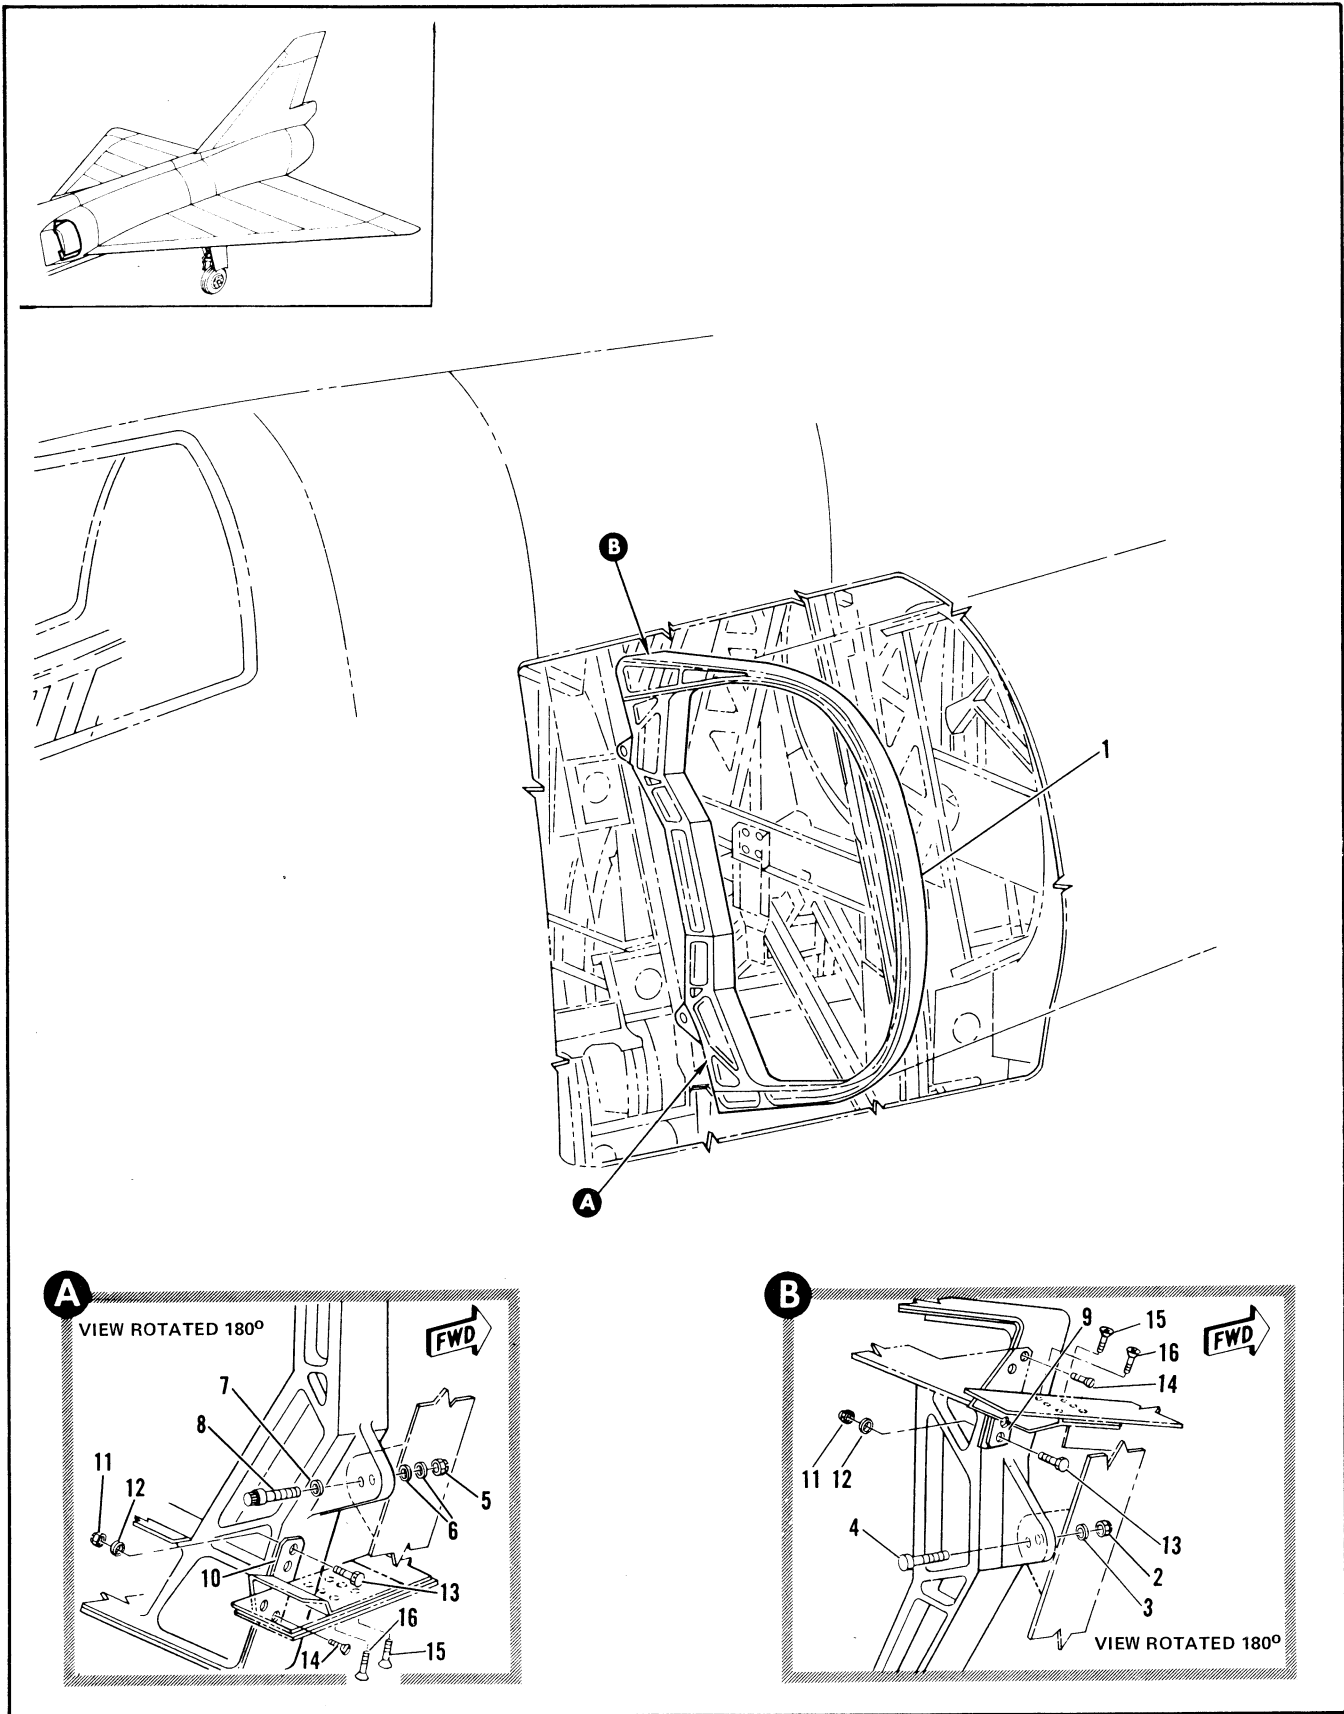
Air Intake Duct Adapter Installation Sta 280
